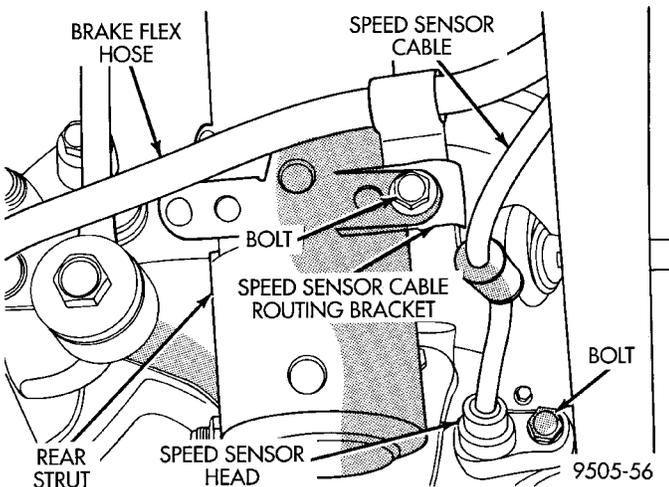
Speed Sensor Head Mounting And Cable Routing
